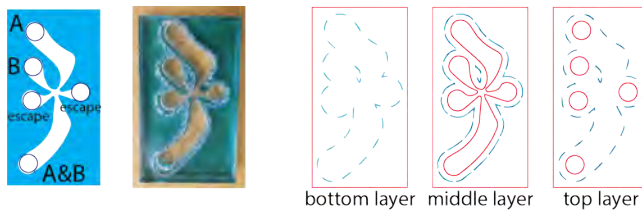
We recreated a classic, planar flueric AND gate (left) on a lasercutter (middle). The three-layer design (right) requires both cutting with material removal (red lines) and welding pairs of layers (blue lines).
